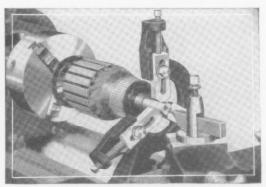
Restoring a Damaged Center Hole in an Armature Shaft
